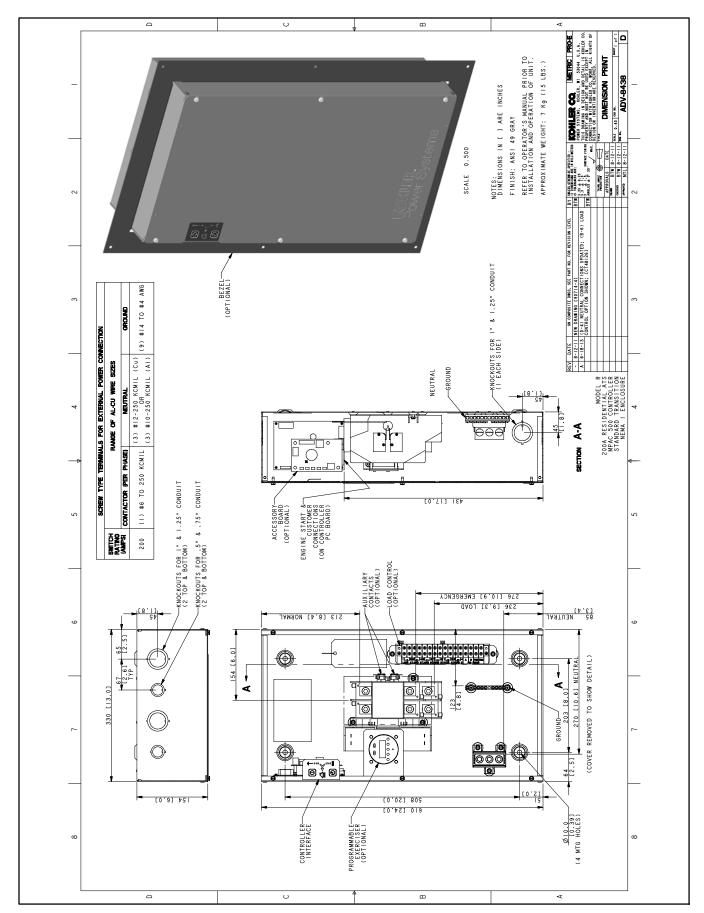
Dimension Drawing, 200 Amp NEMA Type 1 Enclosure without Load Center, ADV-8438
